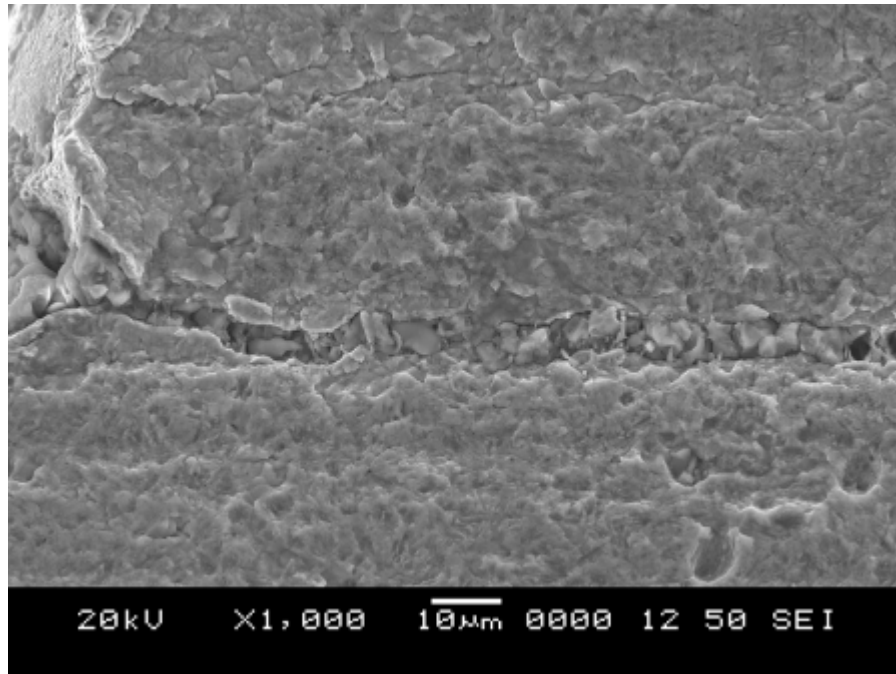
Tooth 29 root, gear half, coast side, cracking along tool marks.
